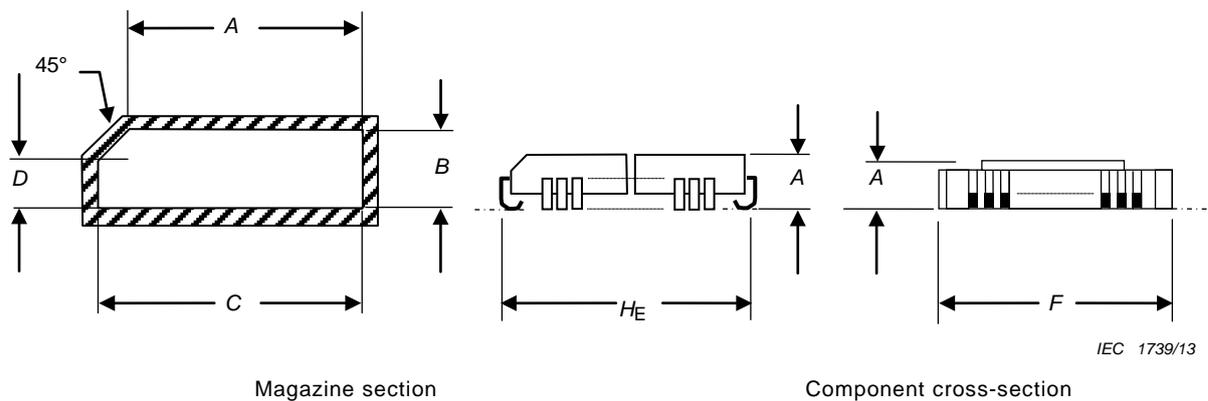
Led chip carrier packages (PLCC) for surface mounting
